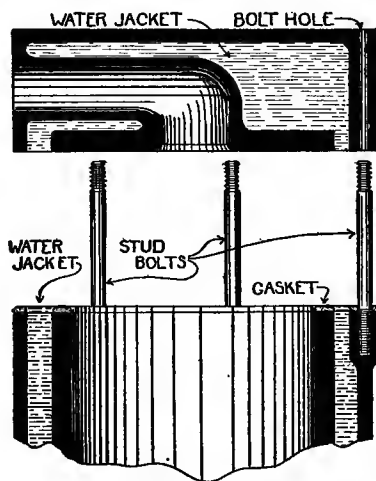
“BOLTED-ON” CYLINDER HEAD.
